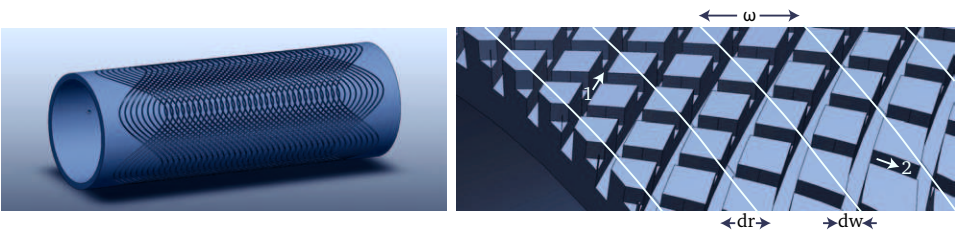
CAD drawing showing the geometry of the support cylinder for a sextupole shim coil demonstrator. In this configuration the two layers, making up the shim coil, are wound onto the same former.
